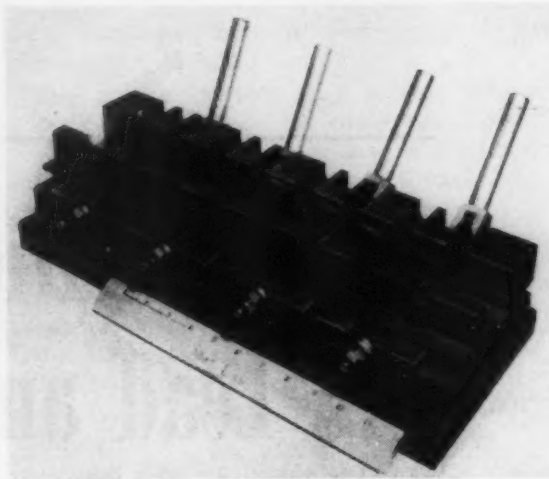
Jig fixture to provide accurate location for straddle milling eight roller bearing bushings while simultaneously slab milling eight more.
